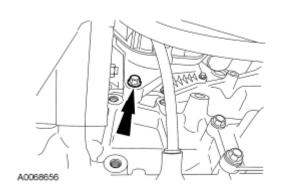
Locating Vacuum Hose And Quick Release Fitting Courtesy of FORD MOTOR CO.
